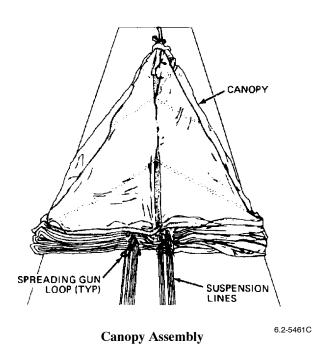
Subassemblies, NES-25A (Sheet 2 of 4)
